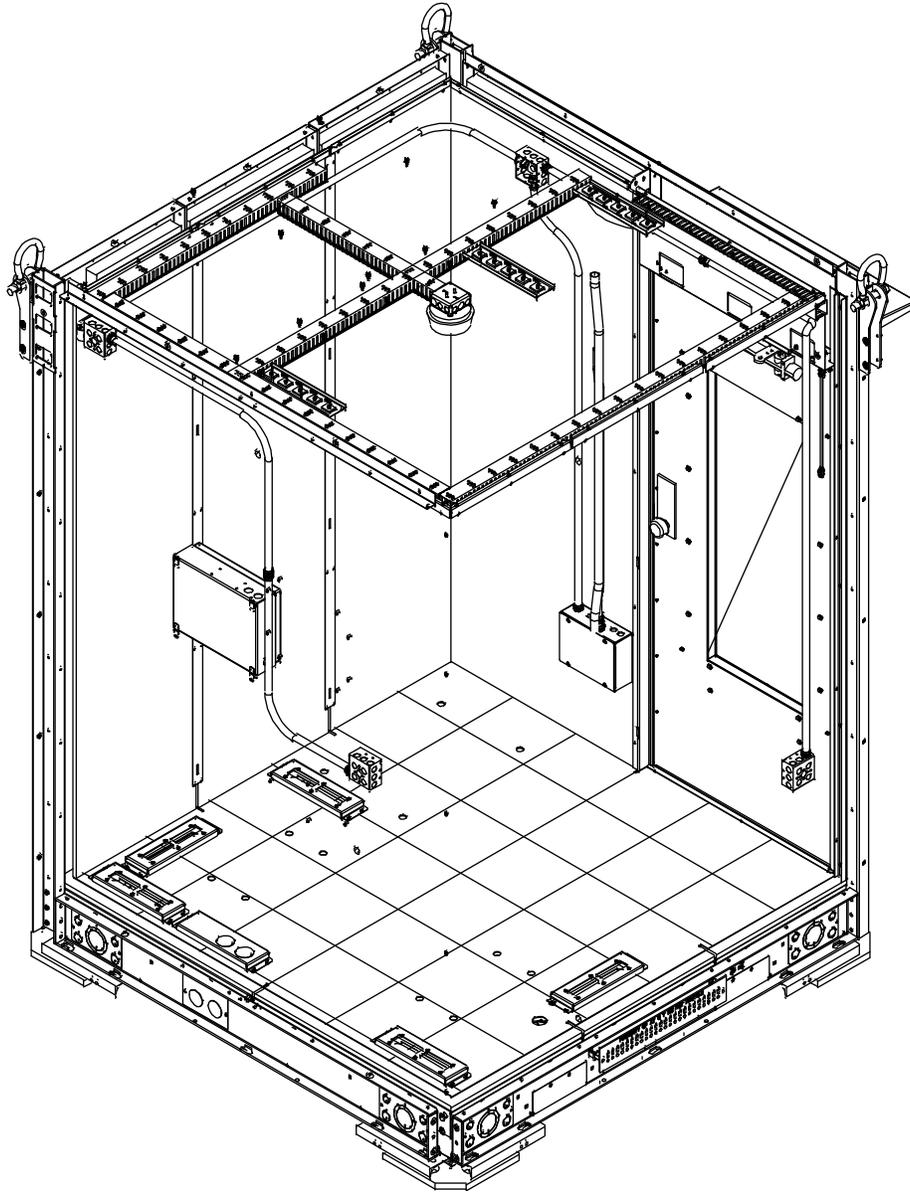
Door Intrusion Switch and Fold Down Laptop Desk Locations
